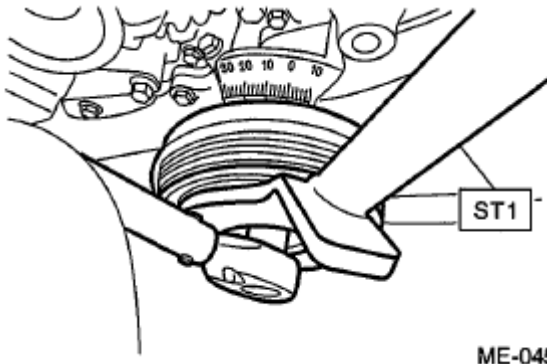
Attaching Magnet Used For Securing ST2 (Angle Gauge) To ST1
